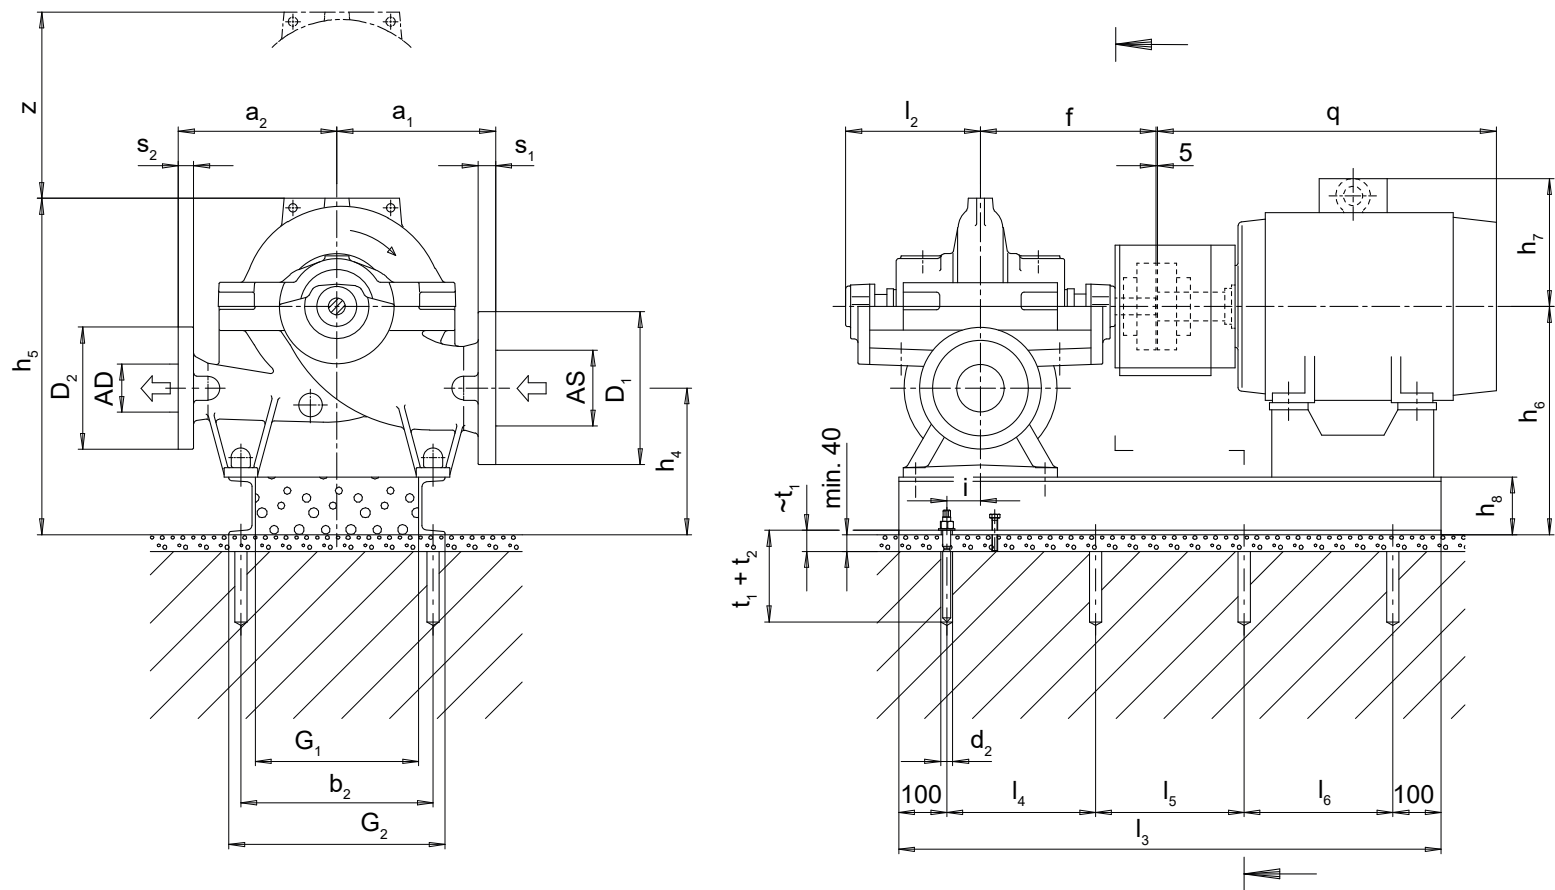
3E base frame with motor base (8 chemical anchors), dimensions in [mm]
